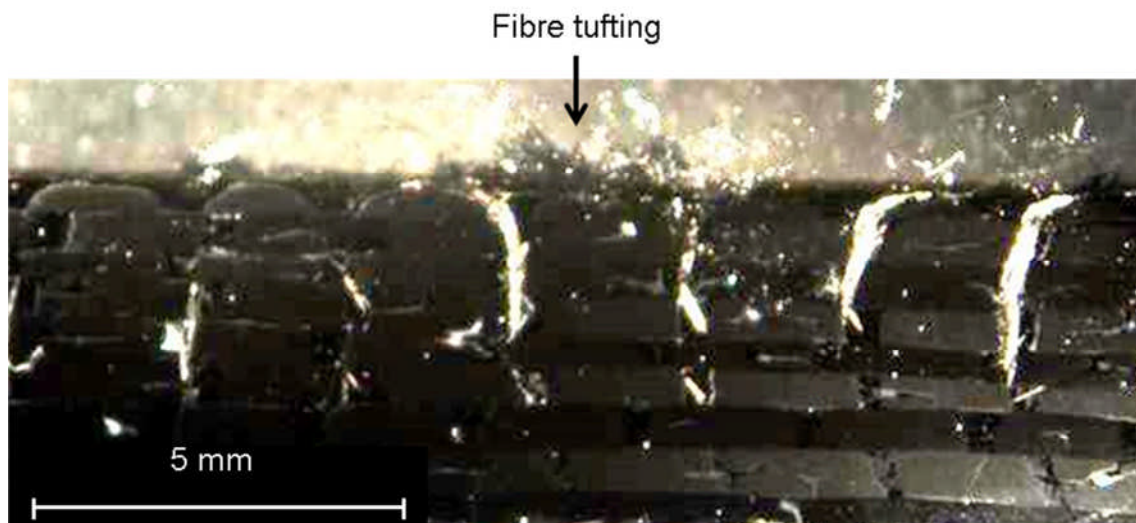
Example of fibre tufting in fully stainless steel tufted panel which also occurred in glass and central square carbon tufted panels.
